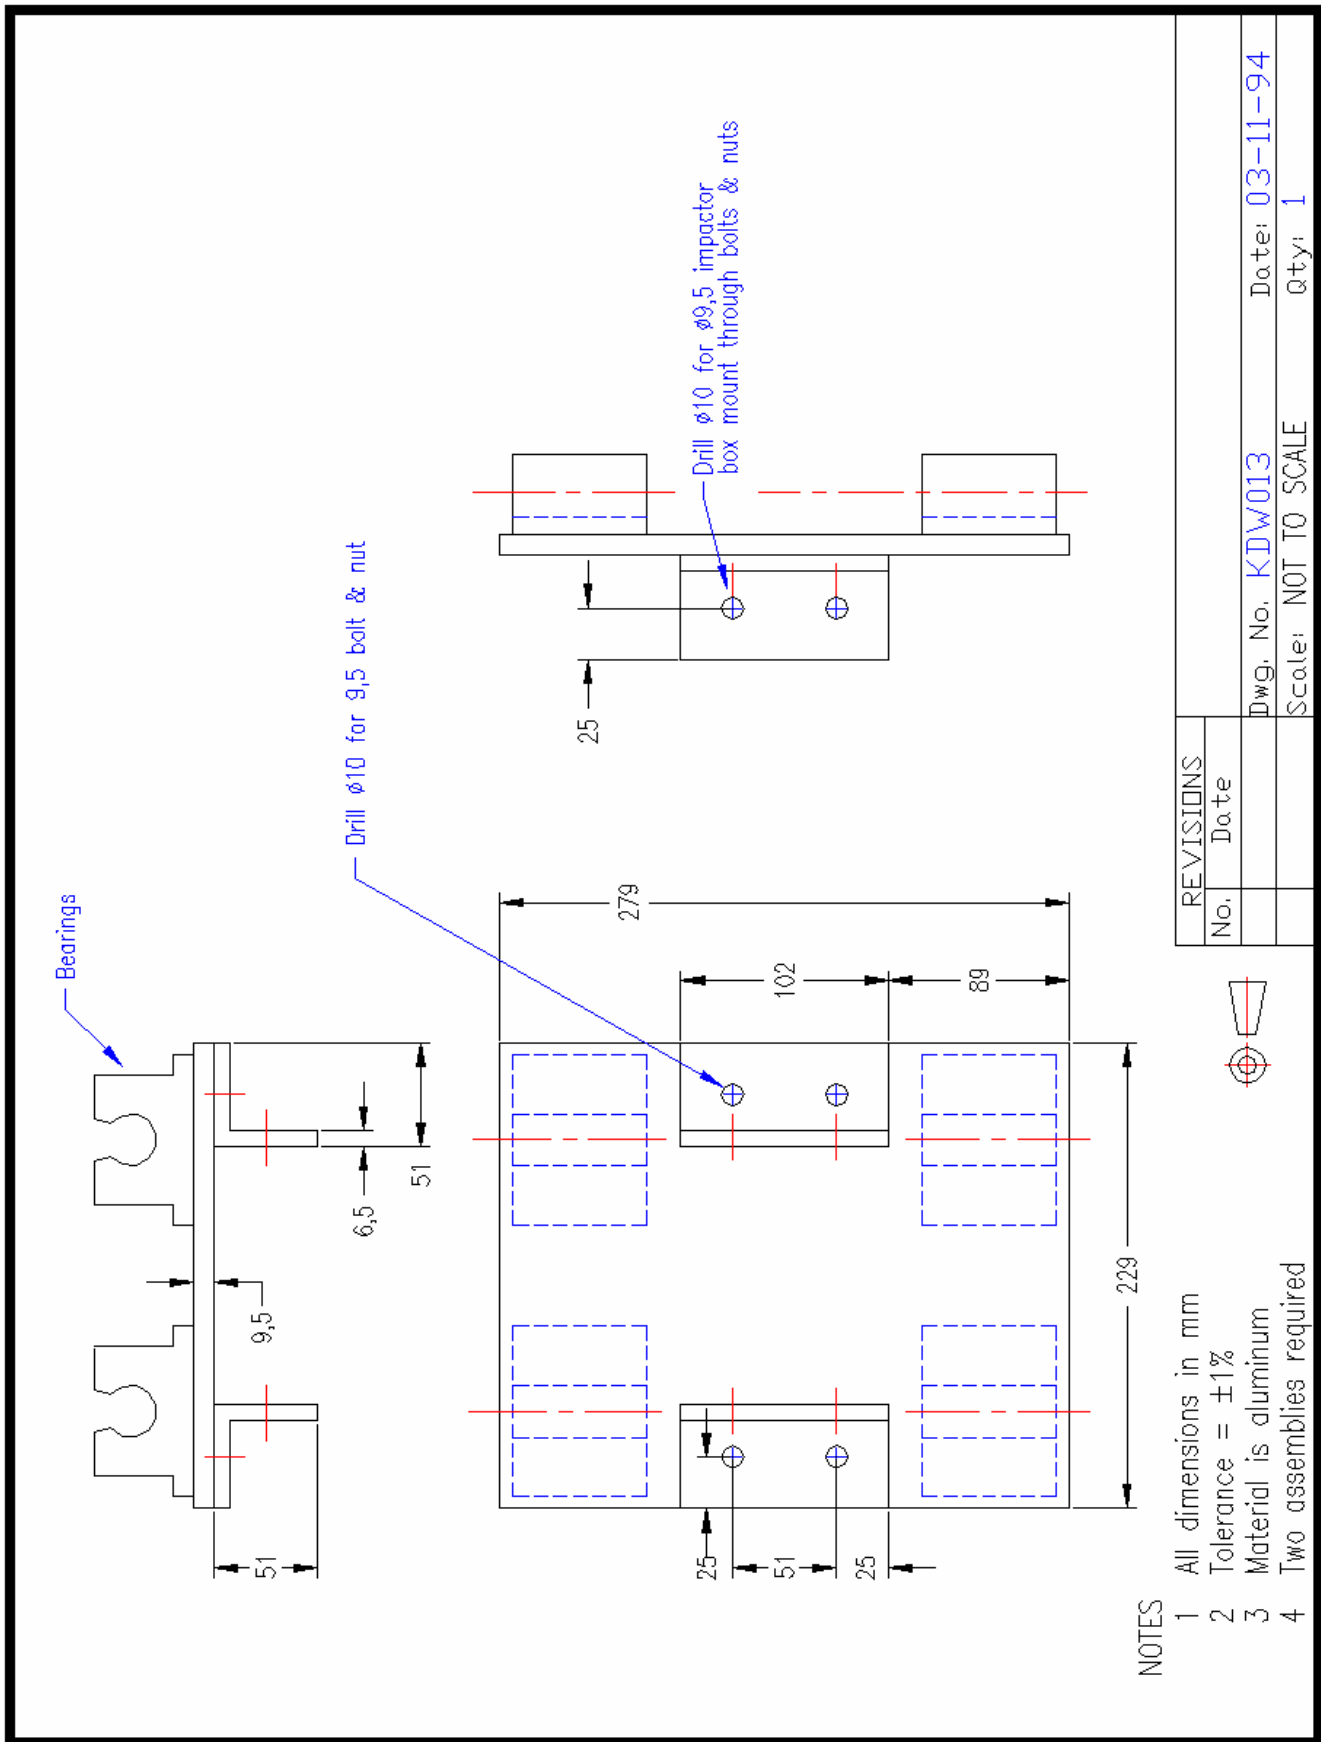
Impactor end plate and bearing mount for the bone dynamic bending fracture test
